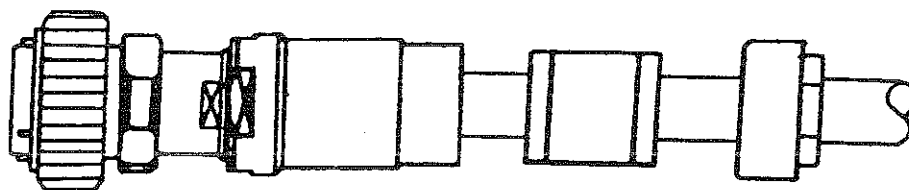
ASSEMBLE REAR SECTION TO FRONT SECTION
